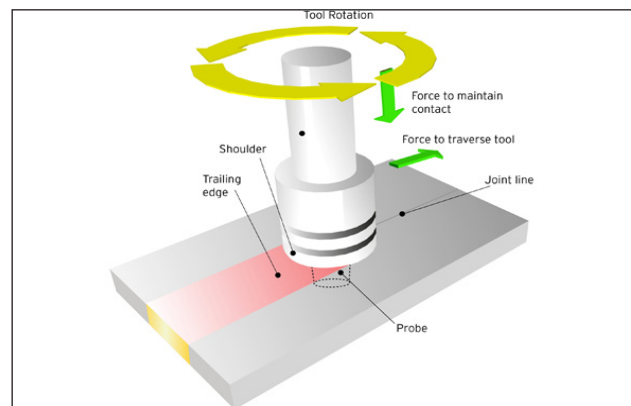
Schematic diagram of Friction Stir Welding process
